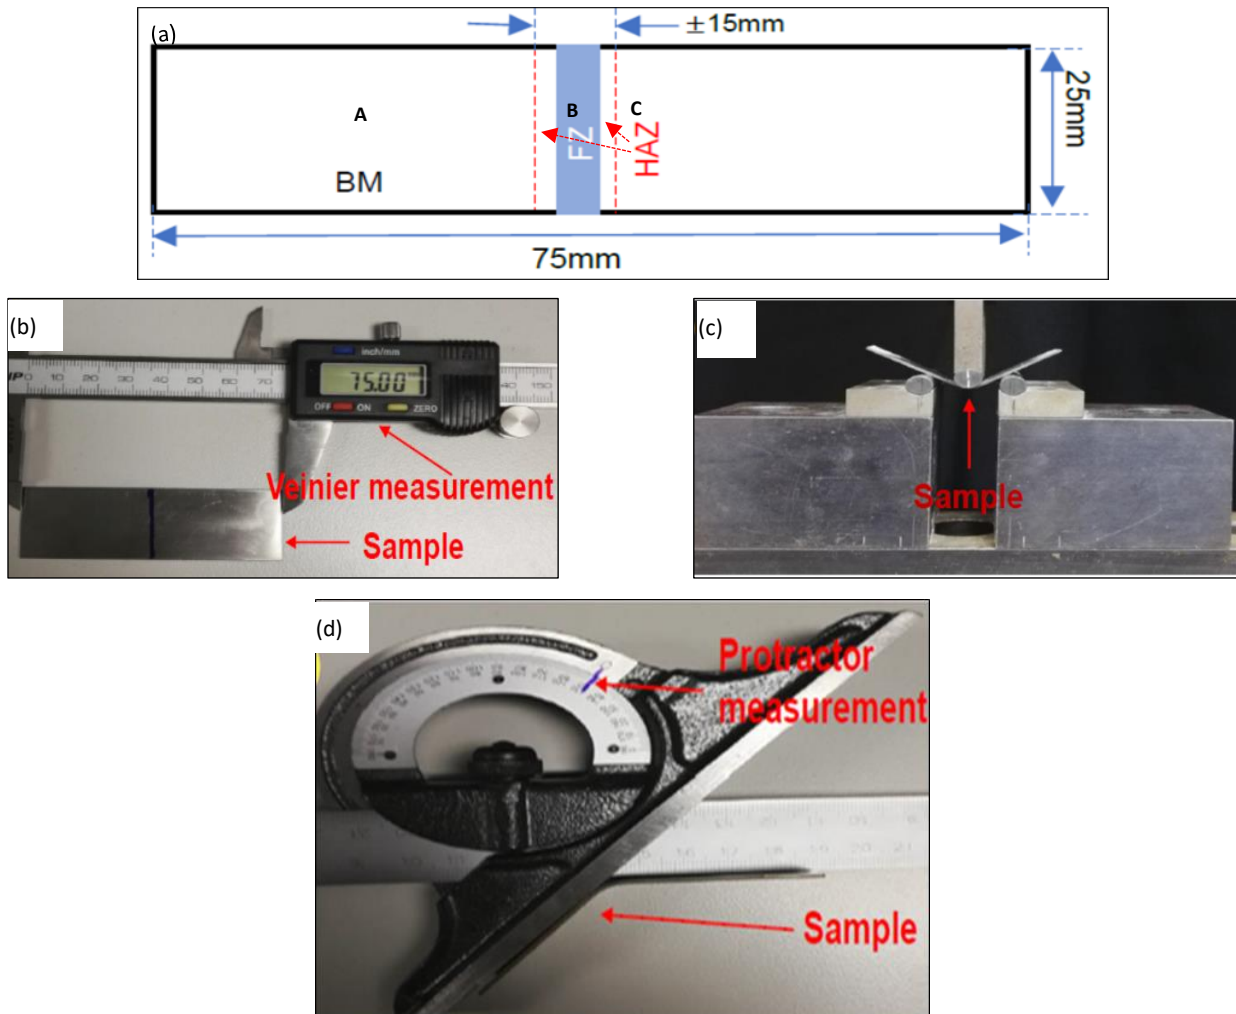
(a) Specimen geometry used in Strauss test, (b) The measured $75 \times 25 \times 1 \text{ mm}^3$ flat specimen, (c) Specimen bended on Zwick bending jigs, (d) Specimen bend angle measurement using the combination square set protractor
